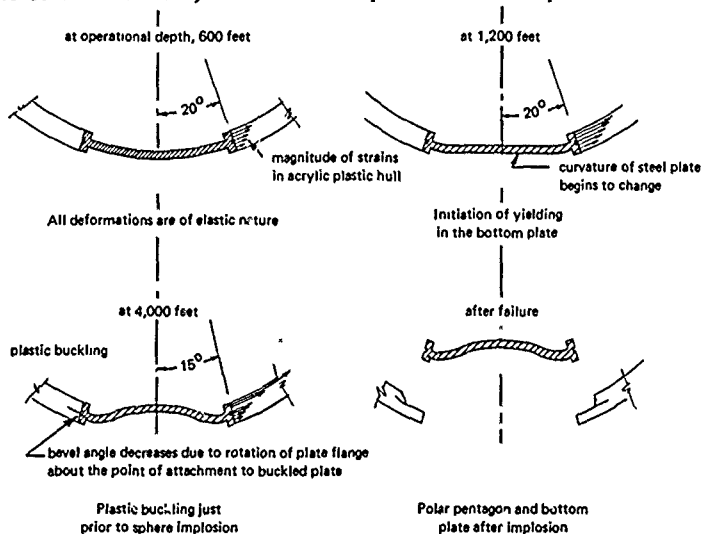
Mechanism of spalling in the bottom polar acrylic pentagon reconstructed from observation of deformation in the bottom steel plate and fracture in the bottom polar acrylic pentagon.
